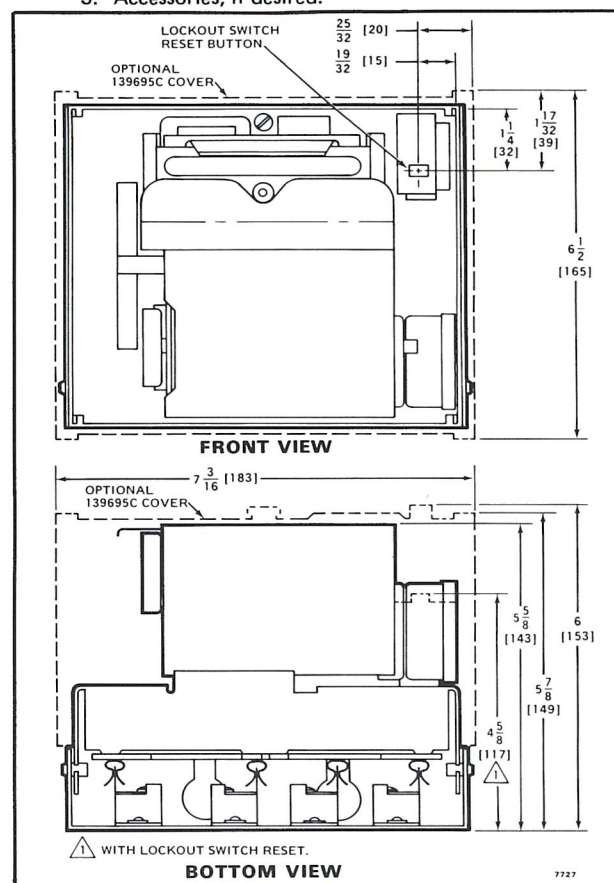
Mounting dimensions of the GP301 Programmer on the Q520A1147 Wiring Subbase, in inches [millimetres shown in brackets].
